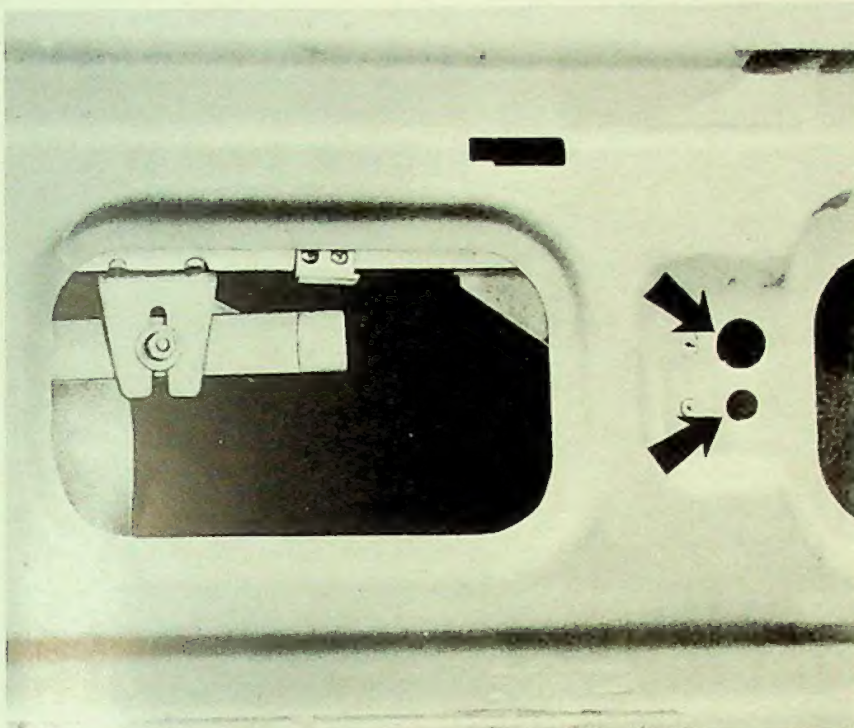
Access to Channel Lower Retaining Screws Is Afforded Through Openings Shown.
